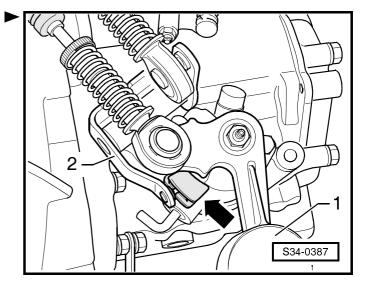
Fitting location of gearbox shift lever/relay ▶ lever
